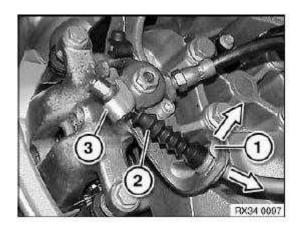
Identifying Parking Brake Bowden Cable And Locking Clip Courtesy of BMW OF NORTH AMERICA, INC.
